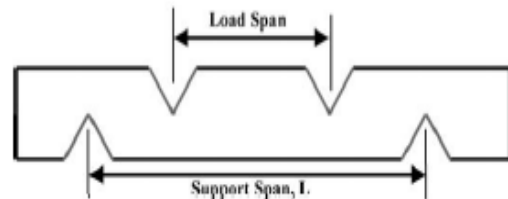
Fixture Used to Align Loading Noses and Supports
